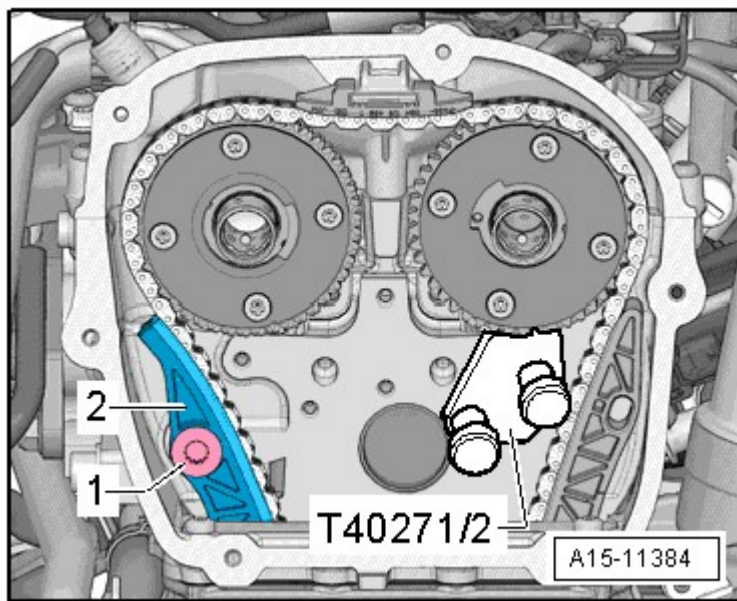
Moving Tensioning Rail Up To Install Bolt
